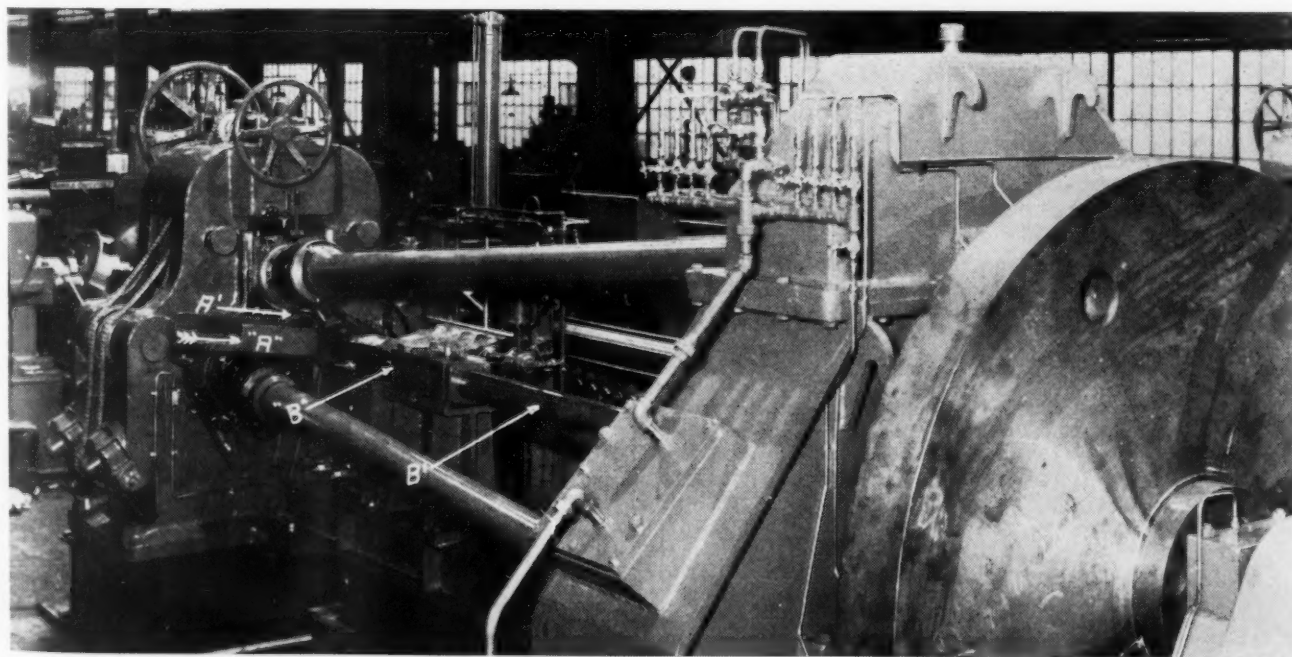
FEED END OF CROSS ROLLS WHERE BILLET ENTERS
